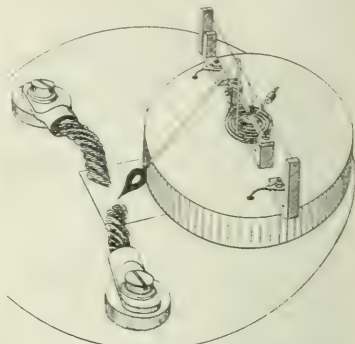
ARRANGEMENT OF MOVING PARTS.
